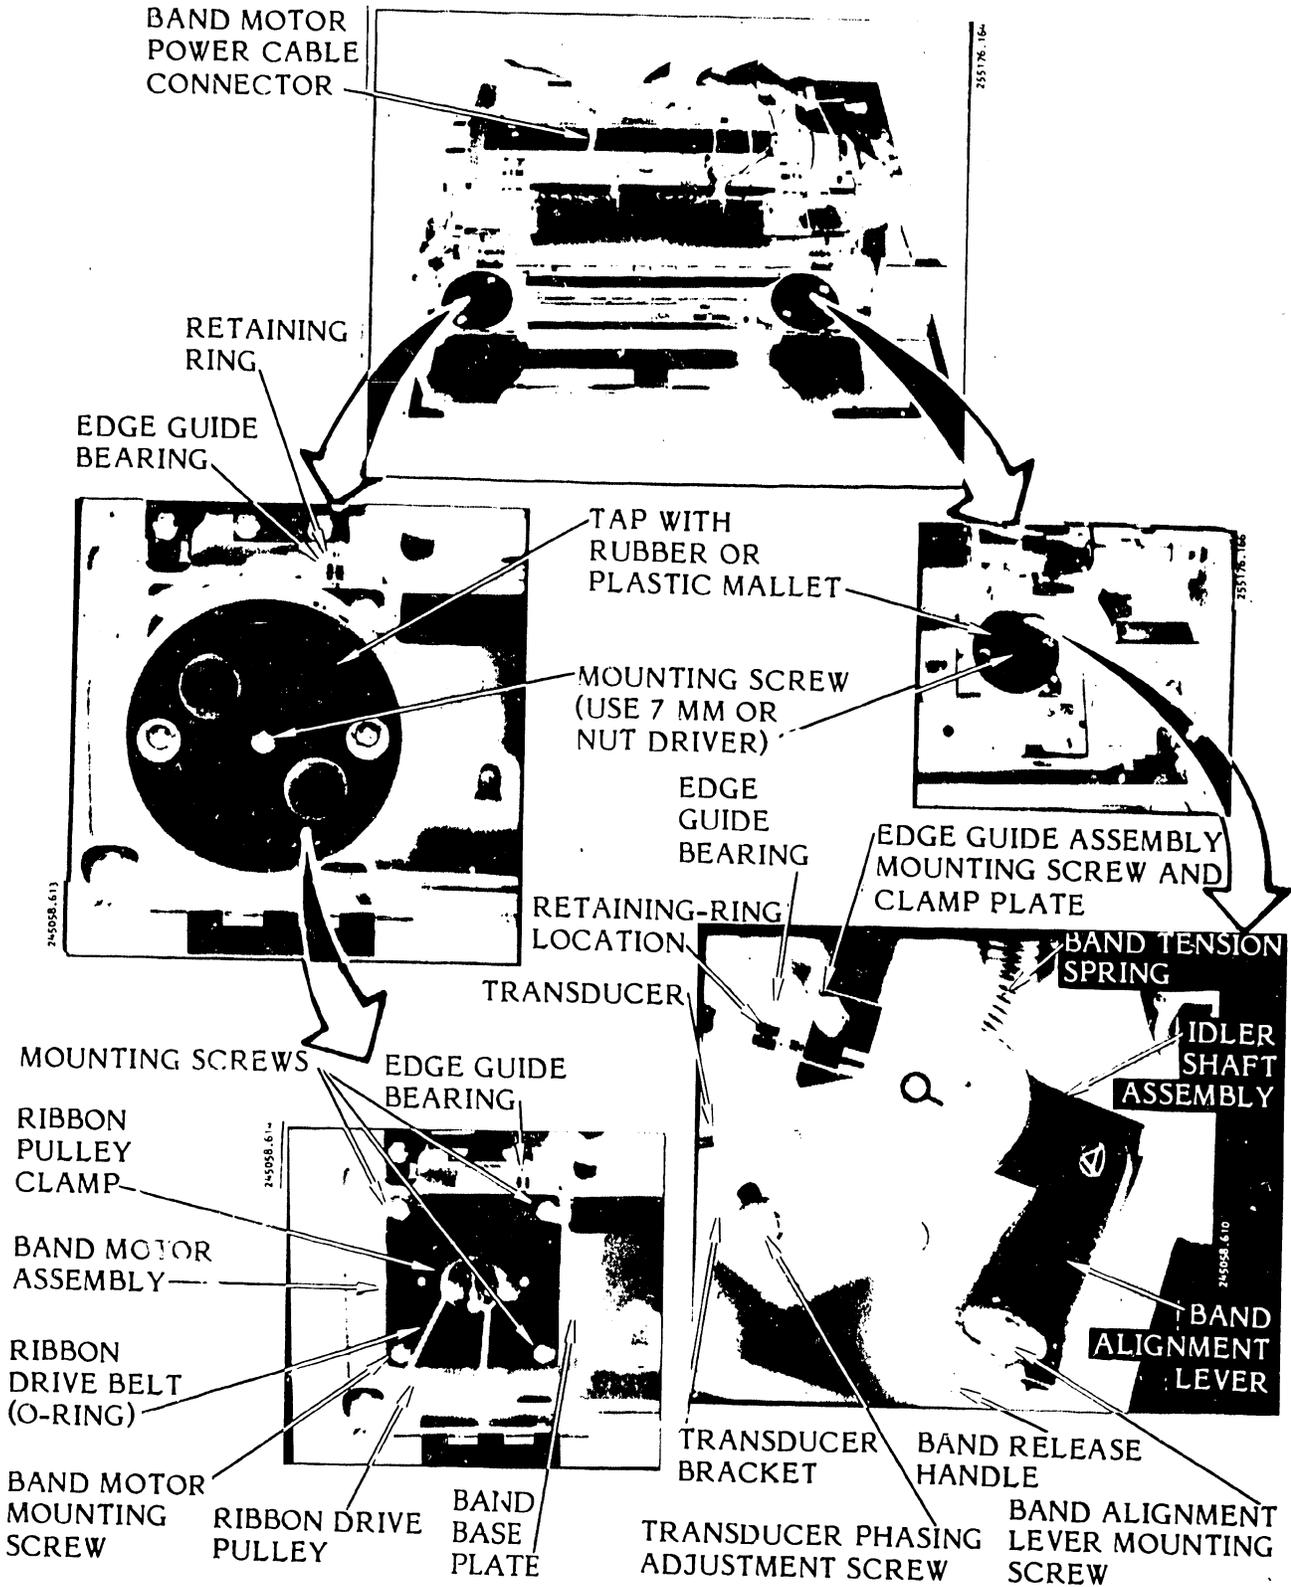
Band and Idler Pulley/Driver (O-Ring System) Removal/Installation
